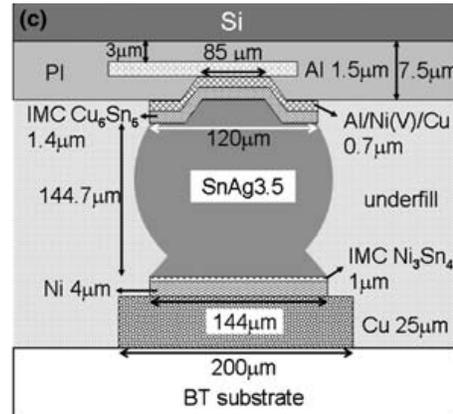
Layout of typical flip chip solder bump joining interconnect line to conducting trace [1].
